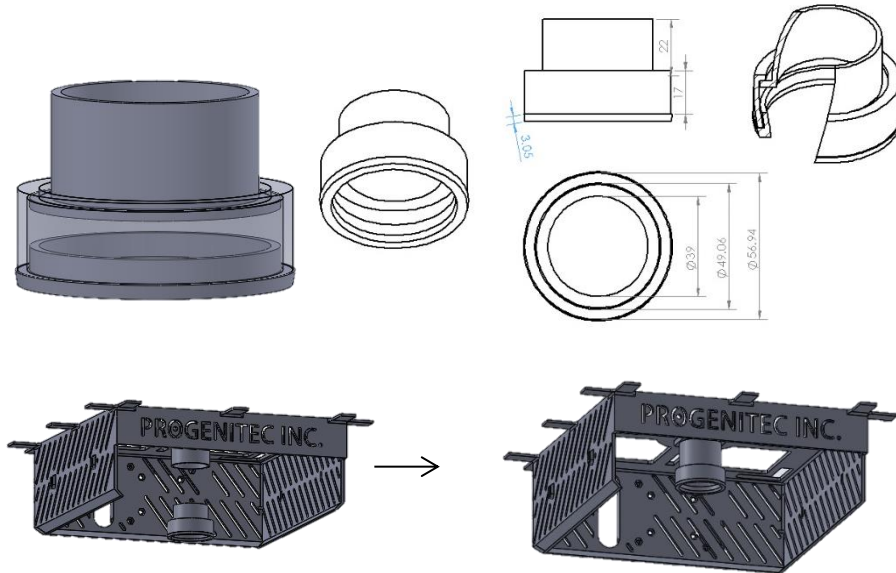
A CAD rendering and technical drawing of the final filter holder design (top). The interface of this revised filter holder design is shown interfacing in a pressure-fit mechanism with the R4 imager design.
